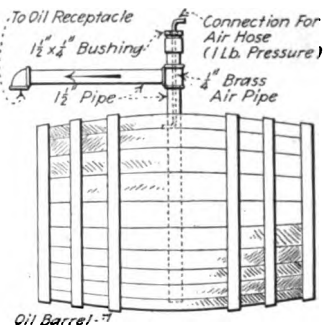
Method of emptying a barrel of oil with compressed air. (It is claimed that with this arrangement a barrel of cylinder oil can be emptied in 5 min. and a barrel of engine or other light oil in 3 min. The air pressure should be throttled down and used with considerable caution. Any restriction of the oil discharge or an attempt to force the oil out against a considerable head will result in bursting the barrel. The method can not usually be applied effectively for very heavy oils. It is useful only for oils forced against low heads. (*Southern Engineer.*)
